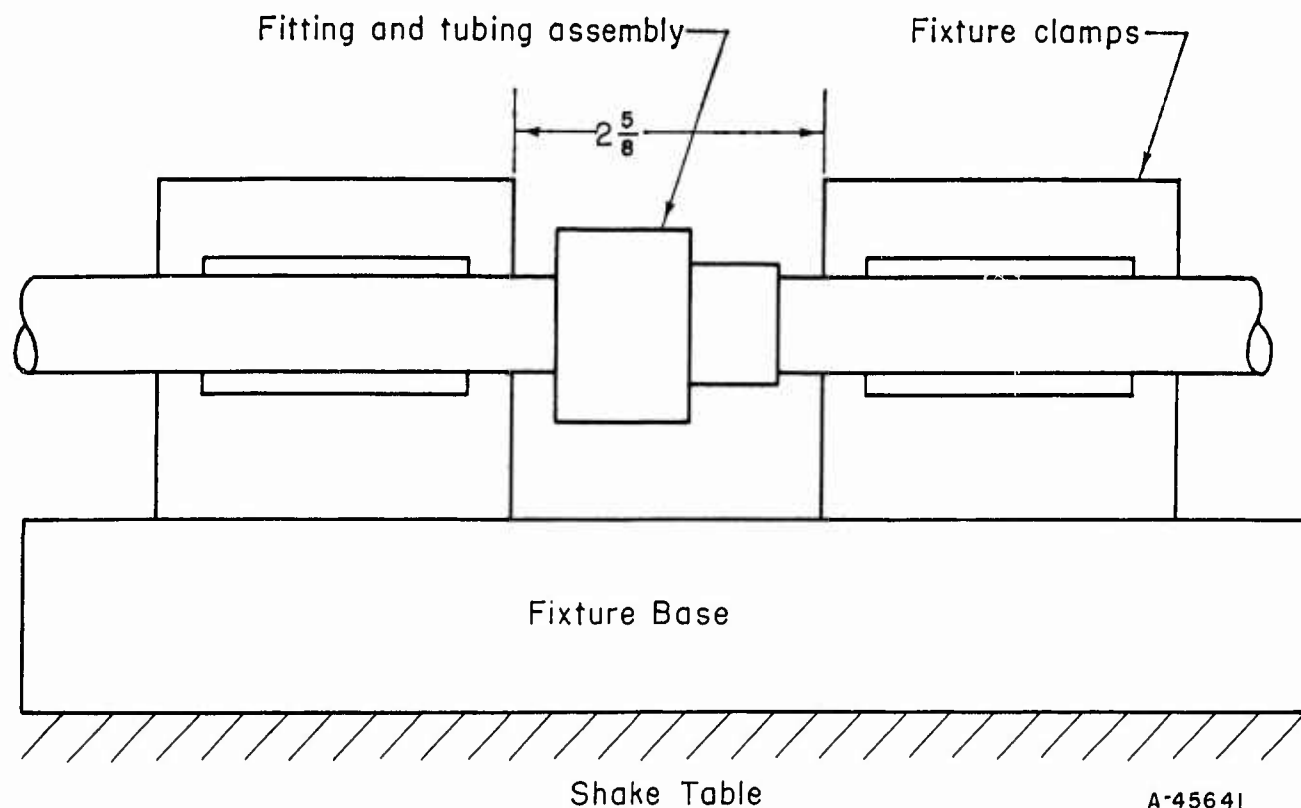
FIXTURE USED FOR VIBRATION TESTS
